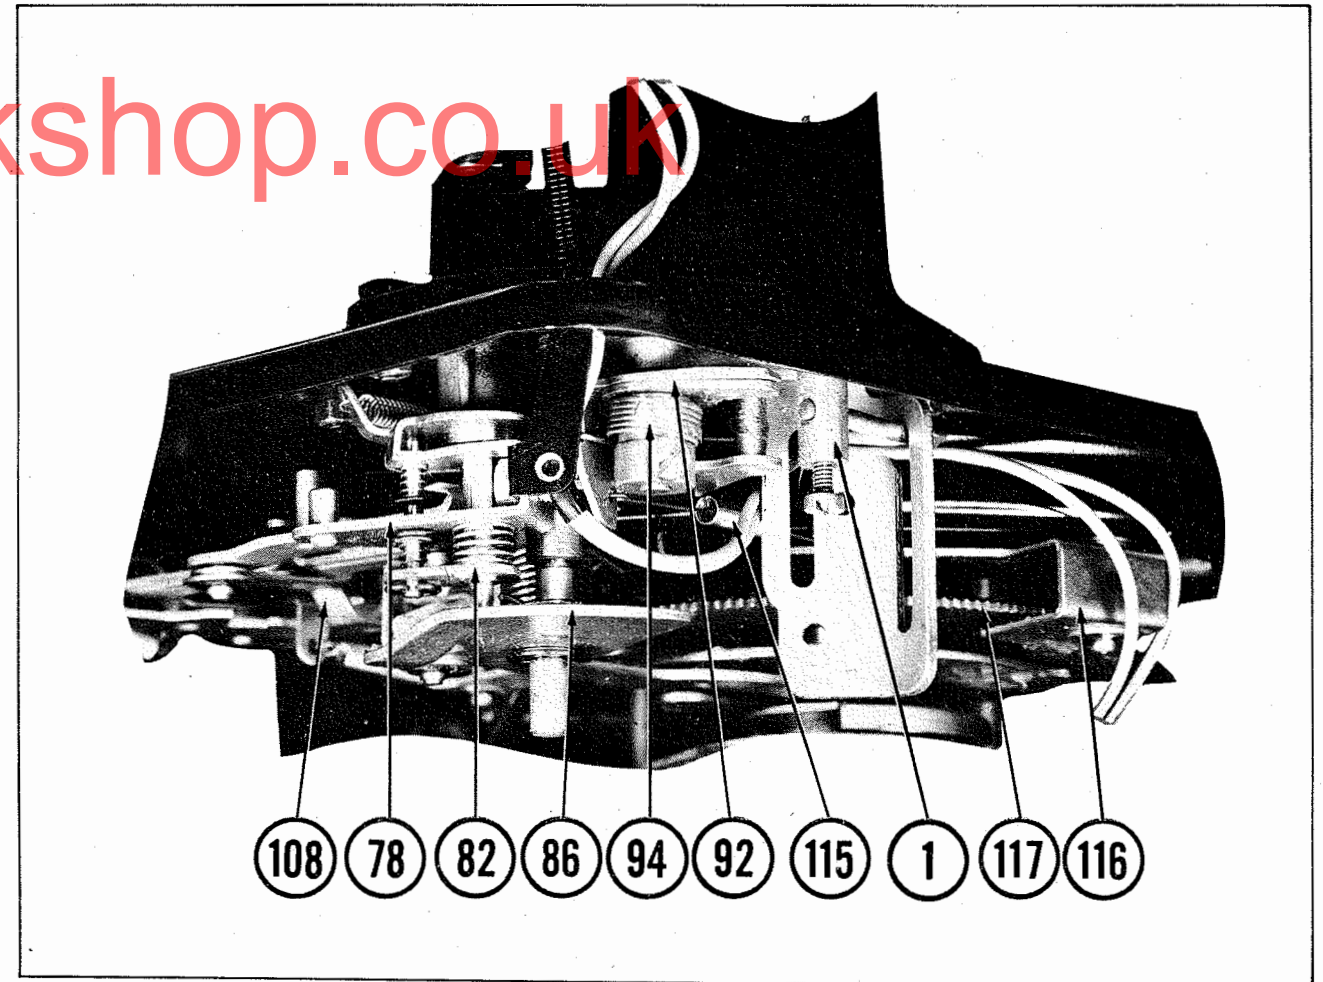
SIDE VIEW OF TONE ARM OPERATING MECHANISM
